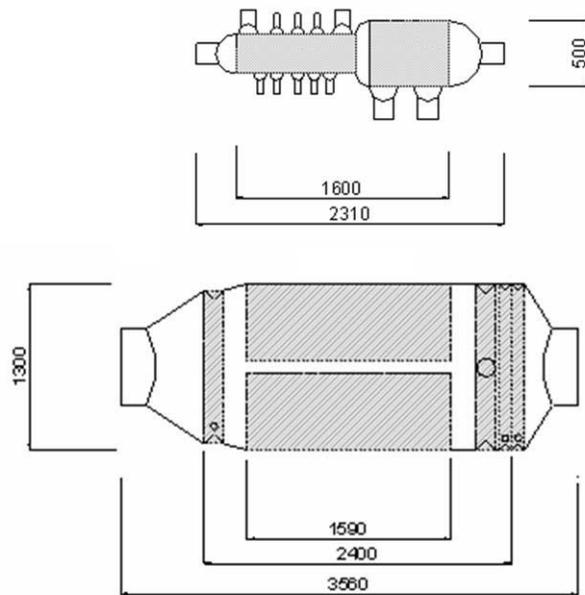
Pre-reformer and Reformer System, Side Elevation (dimensions in mm)
